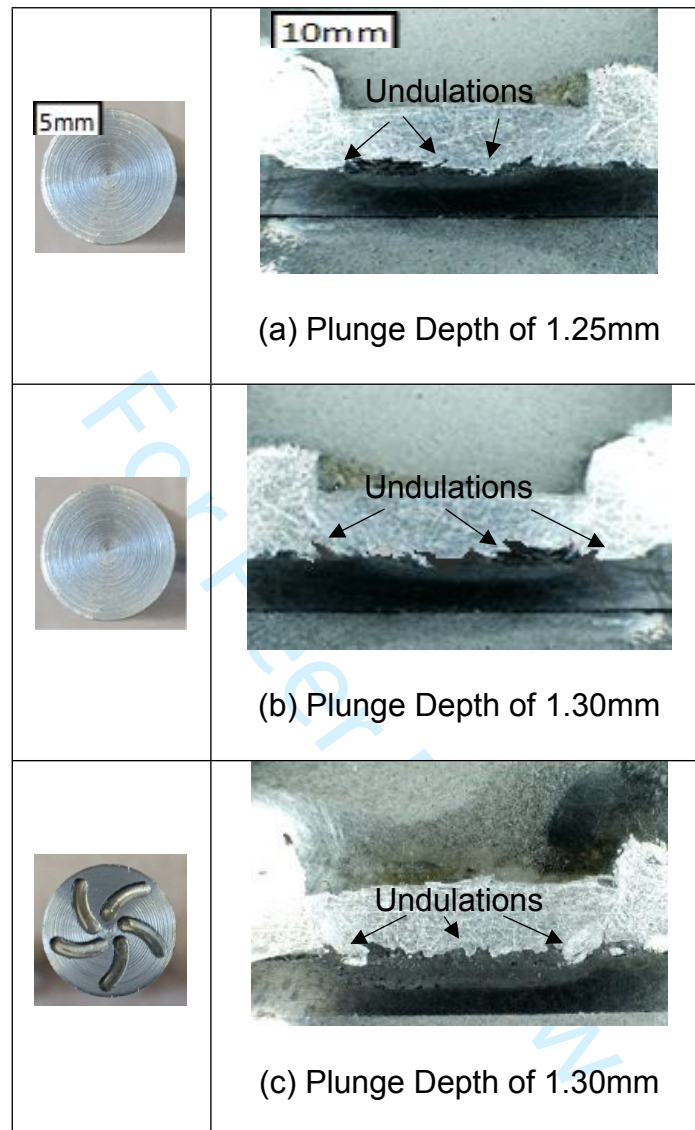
Cross sections of Al-CFRP joints produced using (a) the flat pin design and the plunge depth of 1.25 mm, (b) the flat pin design and the plunge depth of 1.30 mm, and (c) the fluted pin design and the plunge depth of 1.30 mm.
